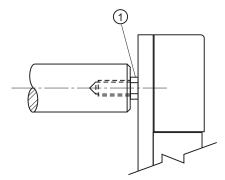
Pulley shaft detail, dimensions in mm (in)
